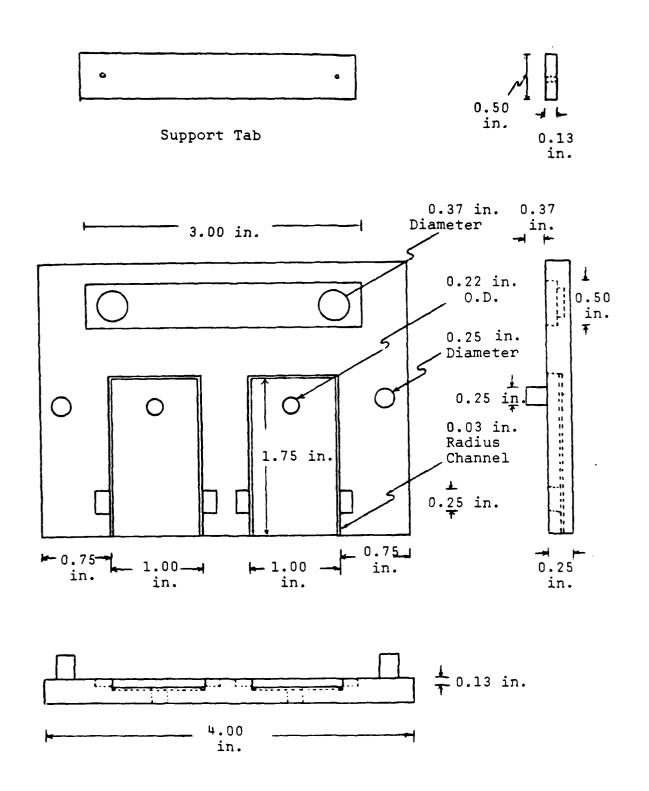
BOTTOM HALF OF BONDING JIG FOR SINGLE LAP BONDS
